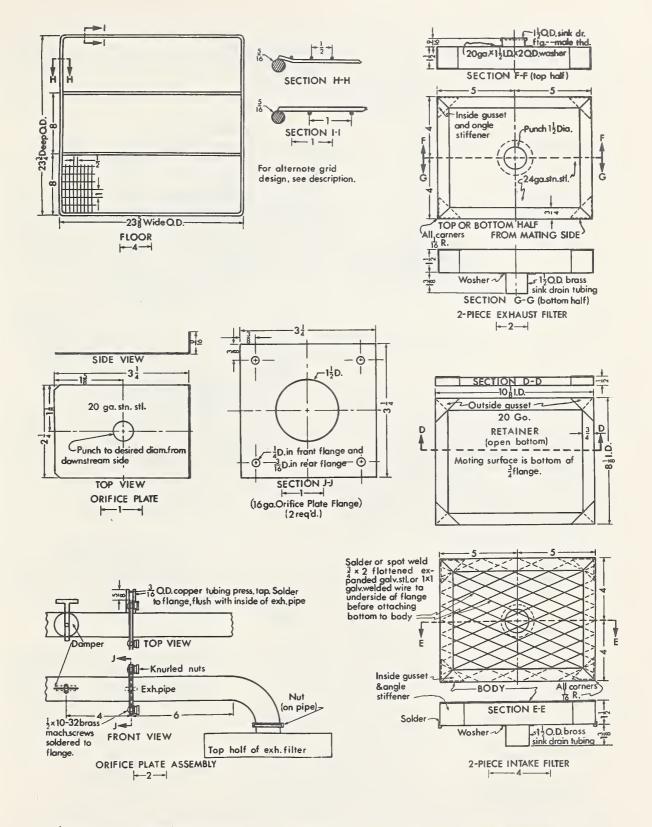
Drawings of floor, filters, and orifice-plate assembly.
